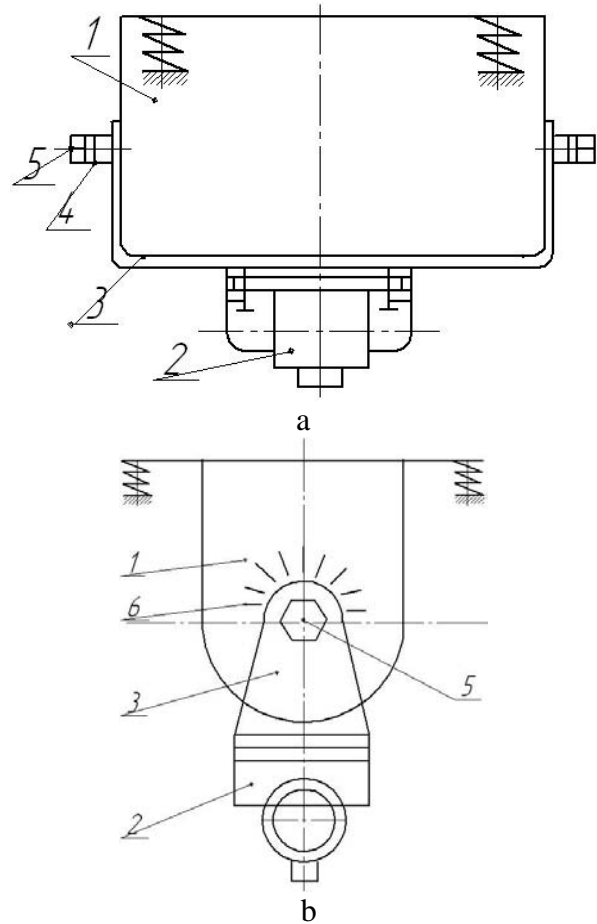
Schematic diagram of the modified vibrating machine VNU-100: a – a general view; b – side view
